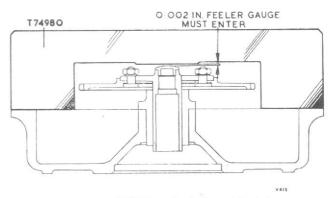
Using gauge T74980 to check the end float clearance from the wheelcase face to the crown of the gear button
